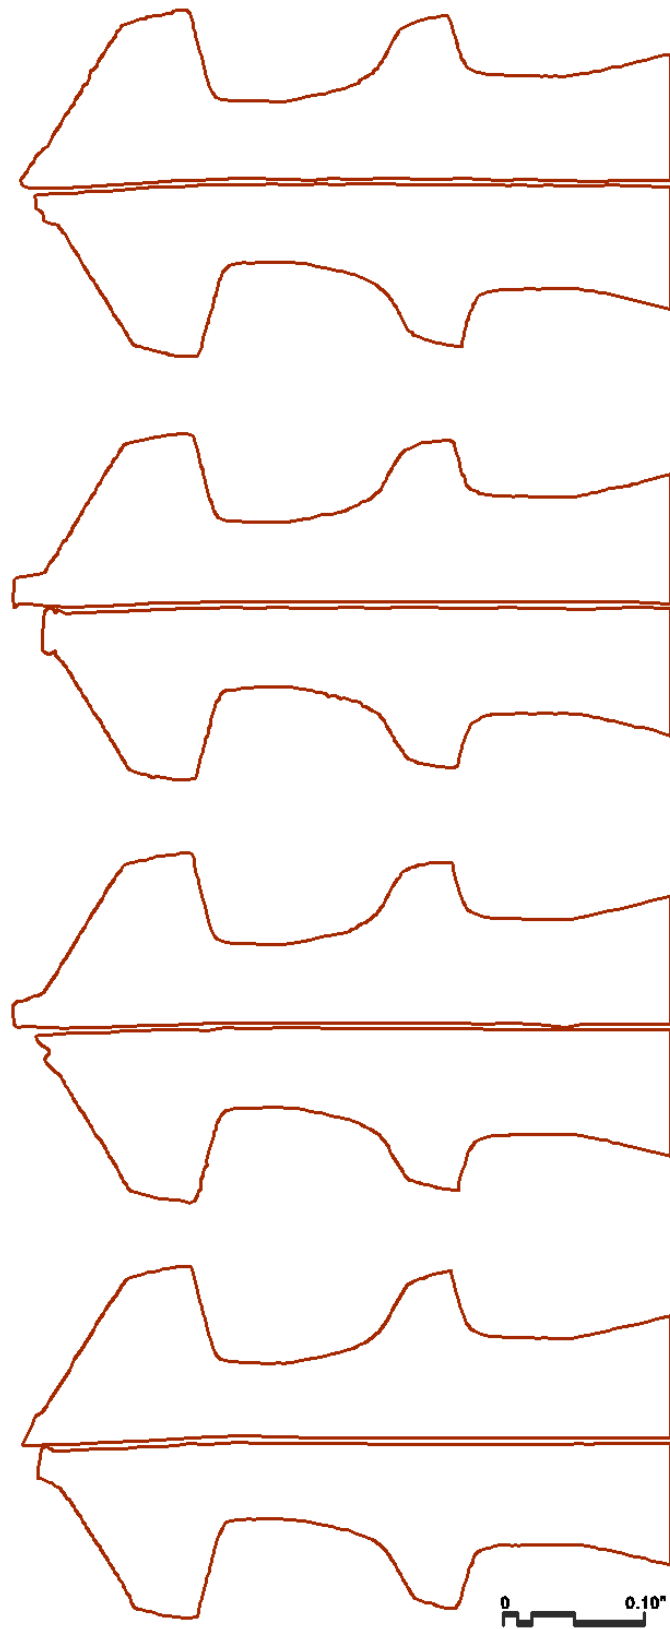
As-Built 0.104 in. Tube-A Coined Pressed-End CAD Generation - Step 4
